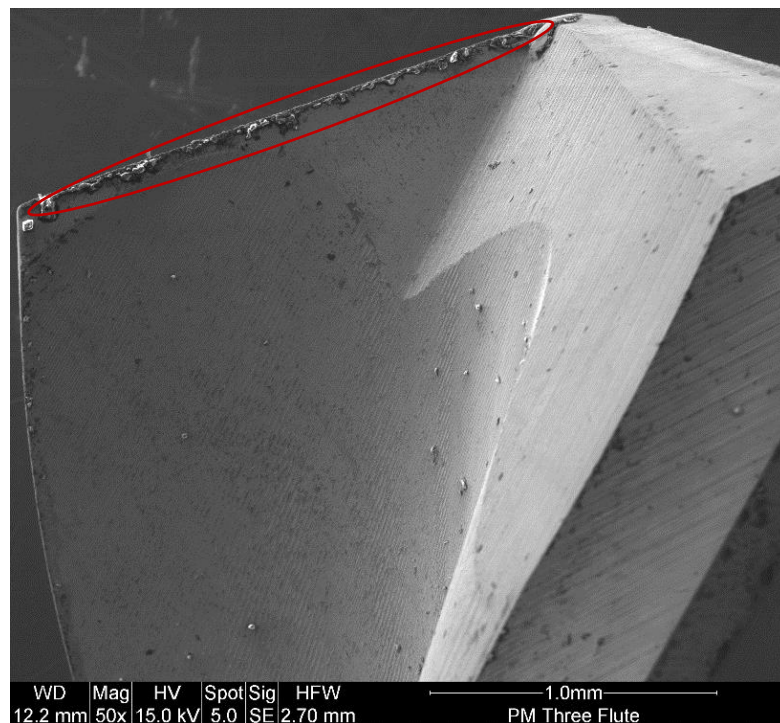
50x SEM flute view of the three flute drill bit cutting edge after drilling 60 holes in PM titanium.
